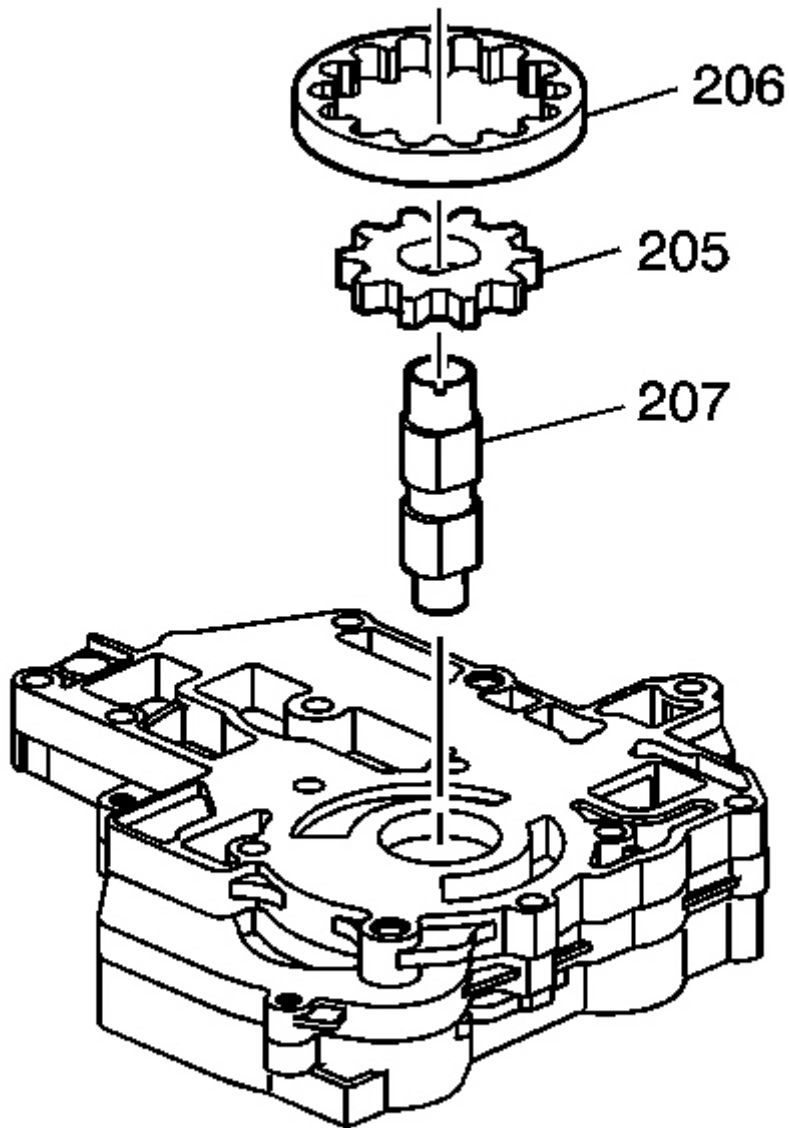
View Of Oil Pump Drive Shaft & Secondary Pump Gears
